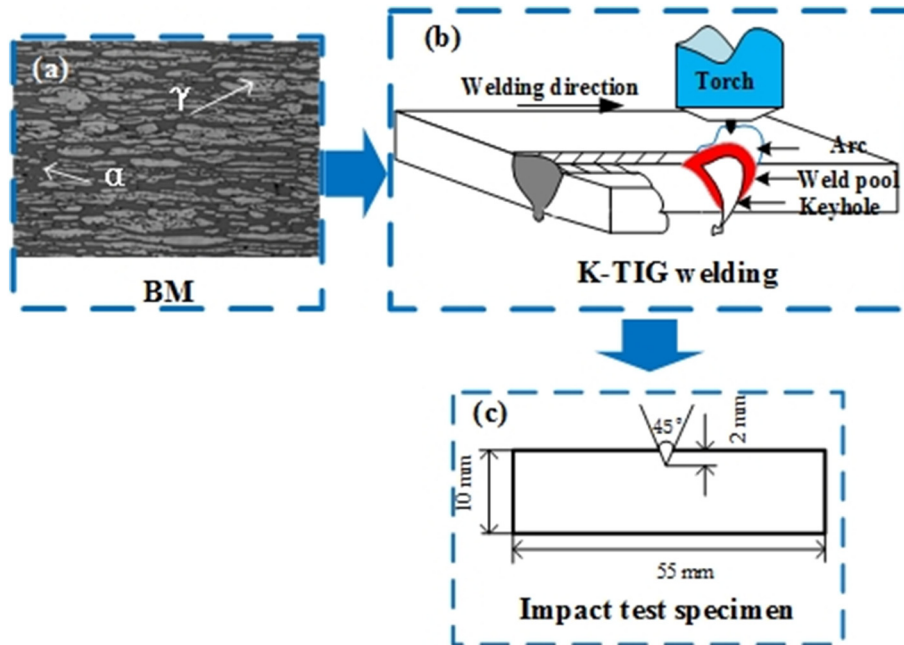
(a) The microstructure of the BM; (b) Schematic diagram of K-TIG welding; (c) Impact test specimen.
